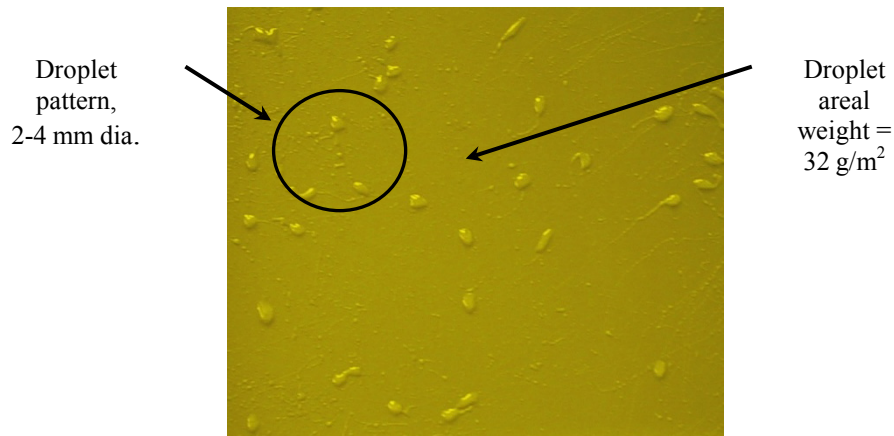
Binder spray pattern and showing resin areal weight.
